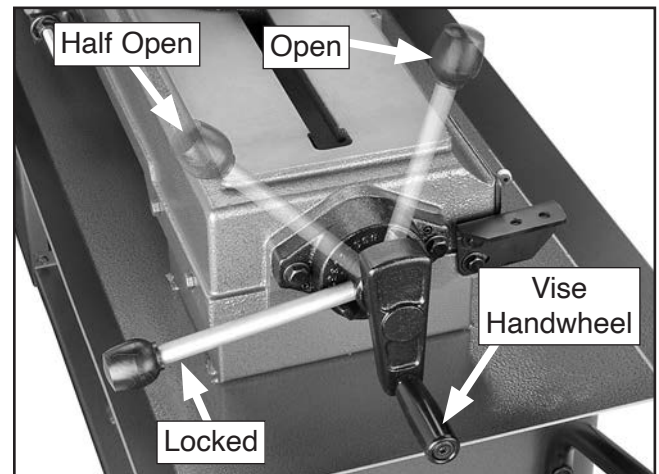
Example of positive lock handle positions and location of vise handwheel.
